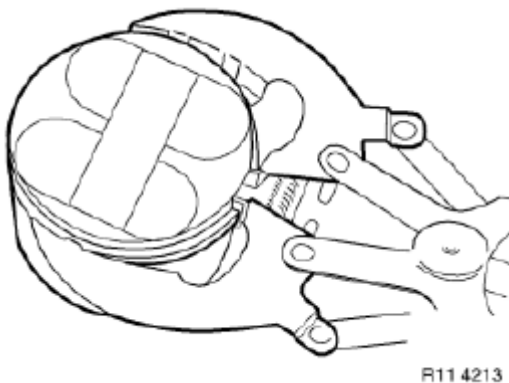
Removing Compression Ring And Stepped Ring Upwards With Piston Ring Pliers
